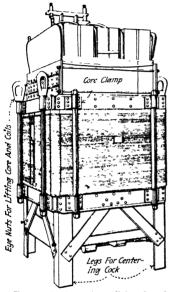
An oil-insulated, water-cooled transformer, of 14,000 kva., 150,000 volts, removed from its tank. (Westinghouse Electric & Manufacturing Co., Inst. Bk. No. 5094-B)
